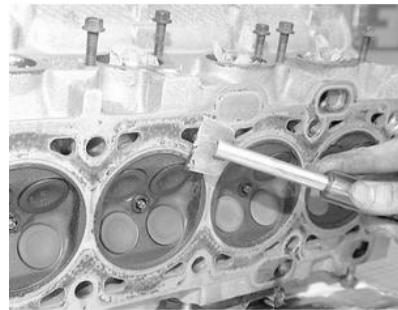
View of the combustion chamber, including the intake (larger) valves, exhaust (smaller) valves, and spark plug electrodes
